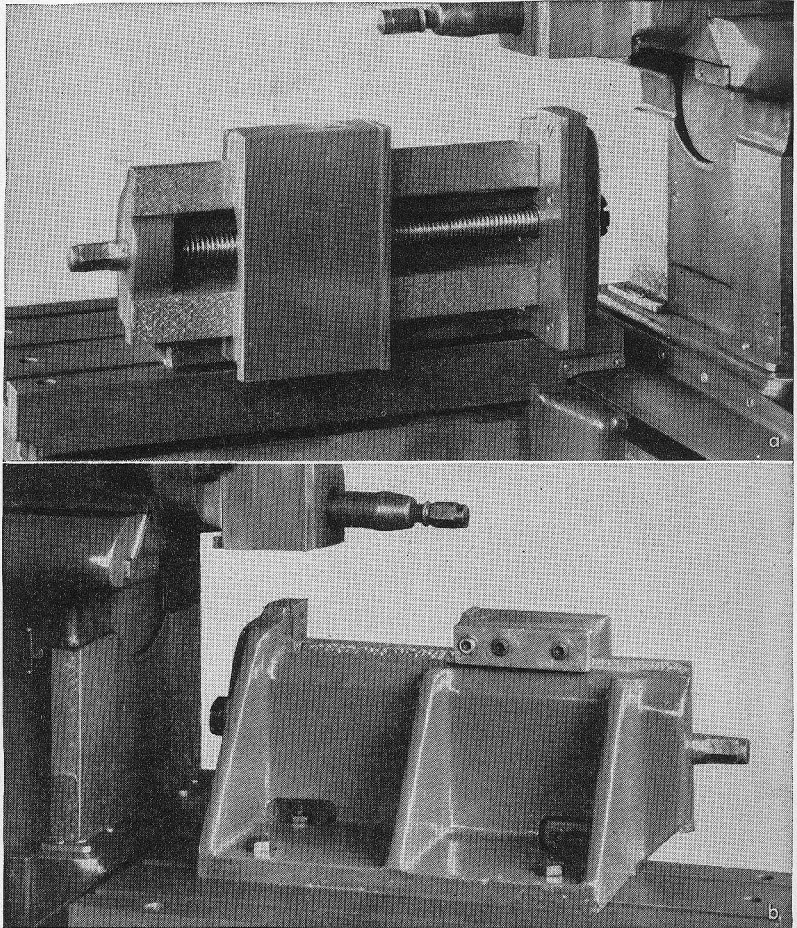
A side vise showing (a) front and (b) back views. (*The Cincinnati Shaper Company*)
